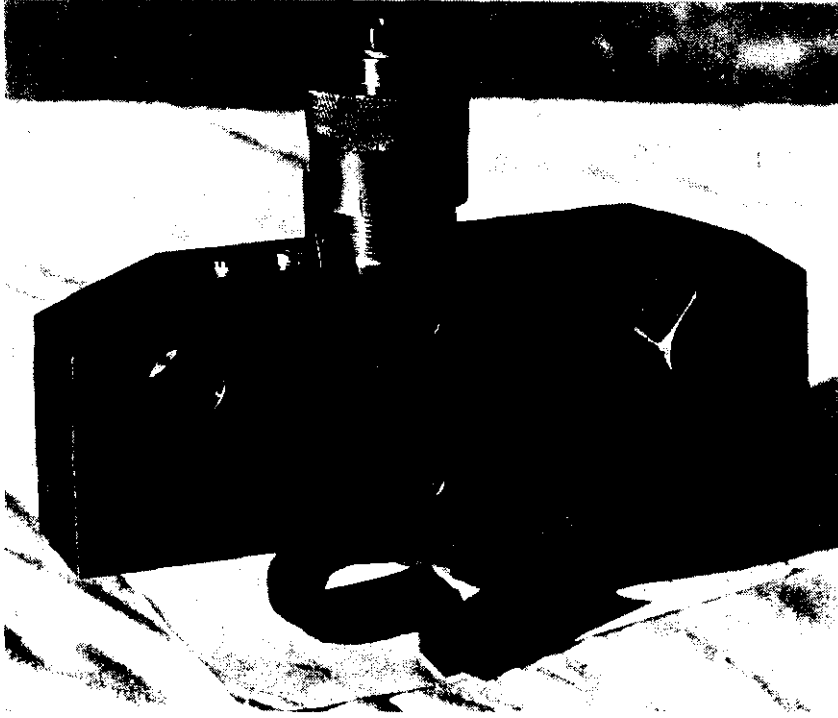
GENERAL VIEW OF TOOL HOLDER AND TOOL AFTER ASSEMBLY
